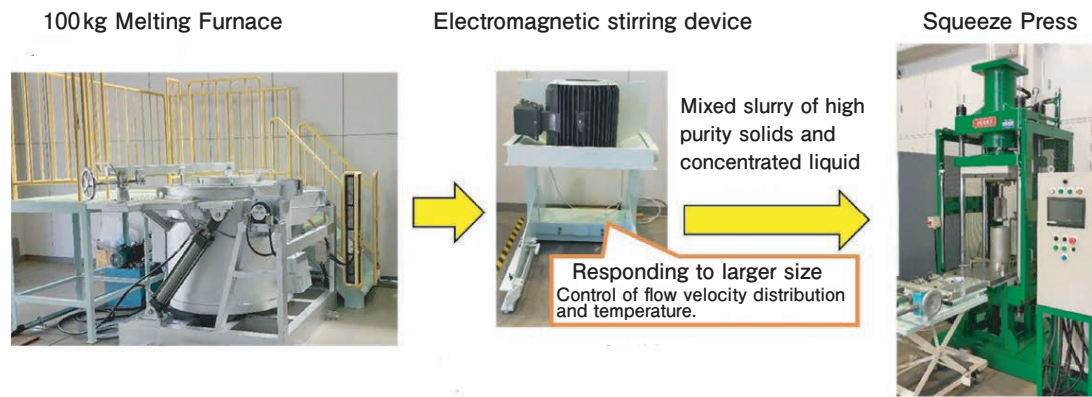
Scaled-up molten metal electromagnetic stirring and squeezing equipment
